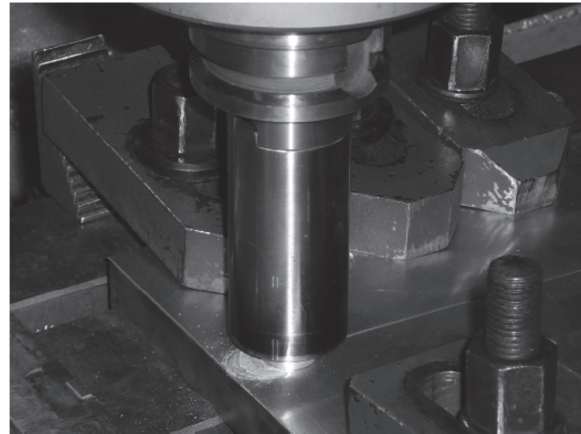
Friction stir welding process of thin sheets using a “pinless” tool configuration ($d_s=19$ mm)
